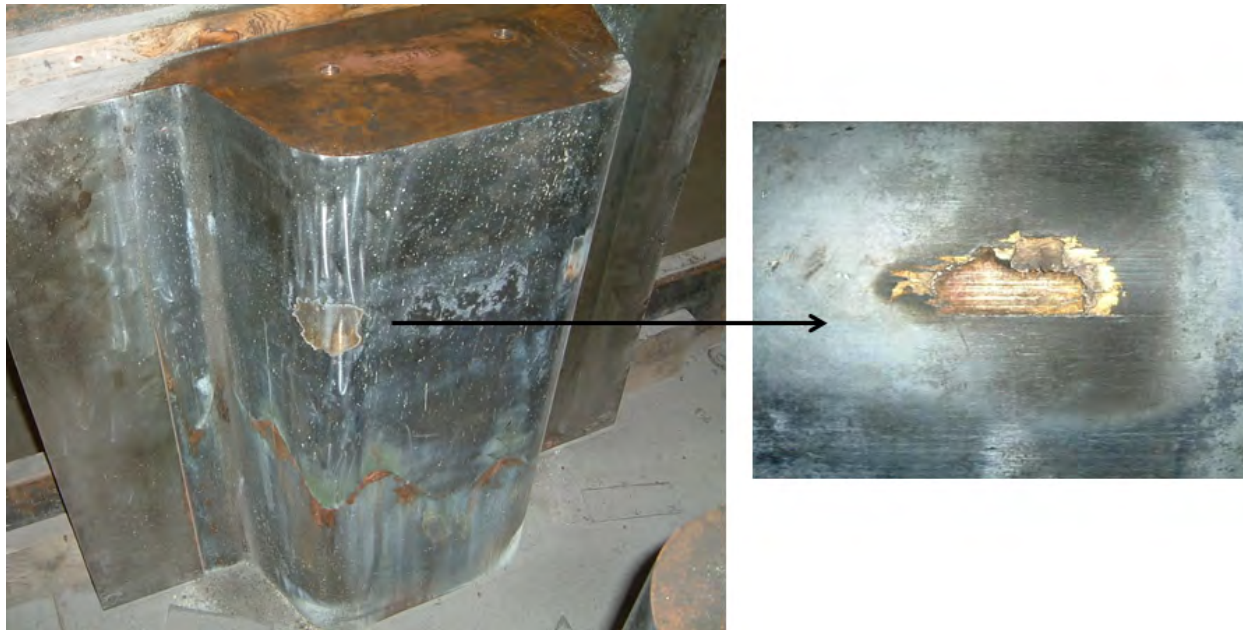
Beam-blank mold failure of hot-face coating layer, coincident with hot spot predicted by numerical model [97]
